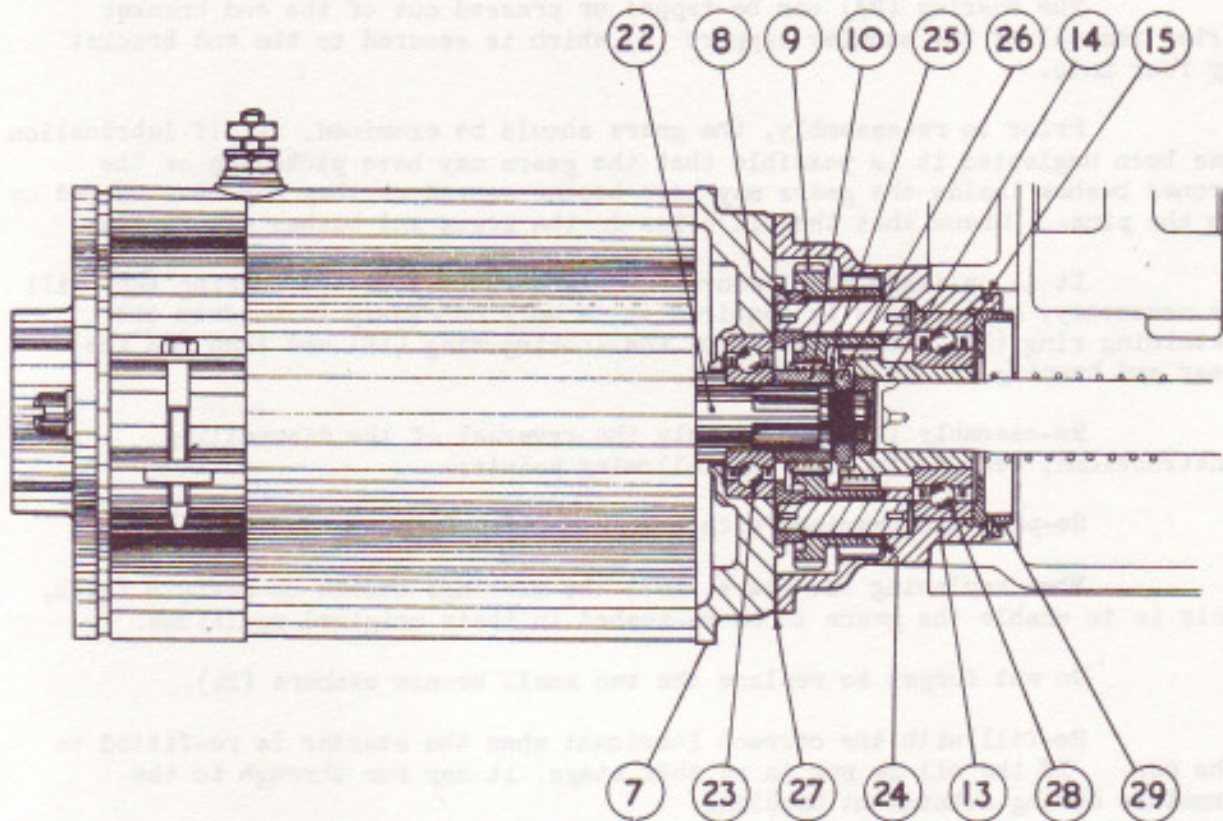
SECTION THROUGH REDUCTION GEAR.
